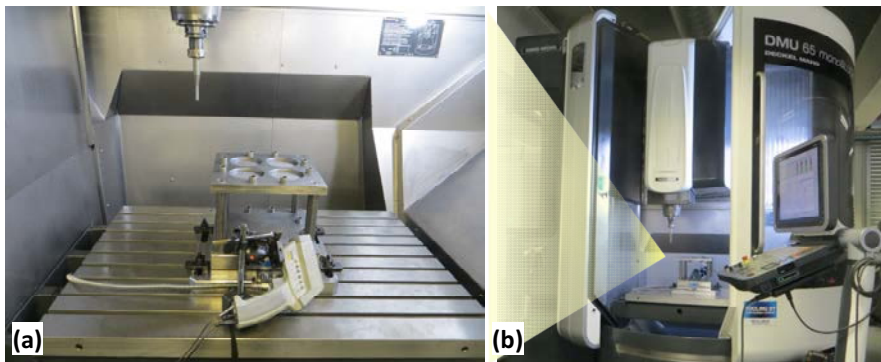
Depiction of the test platform: (a) the fixture, the dynamometer, and the IR-camera (b) the CNC machine
